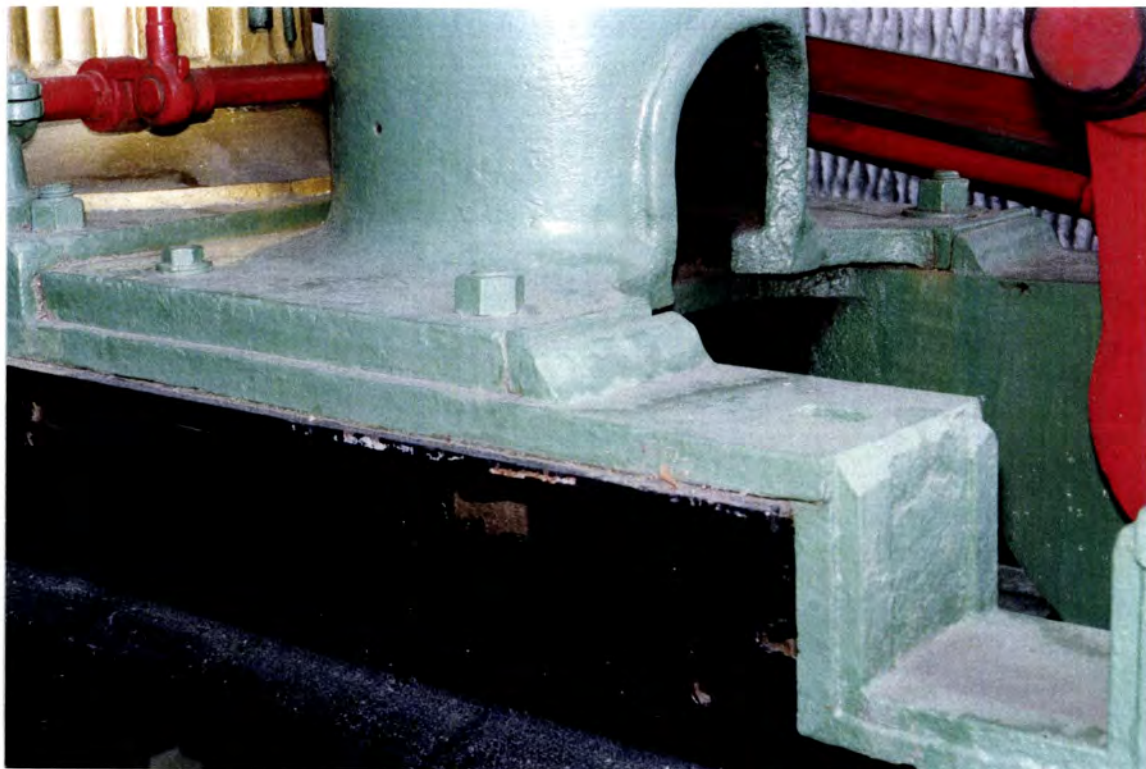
Showing Integrally cast locating lugs in C.I. Base Plate for location of H.P. cylinder and cut away portion of the cylinder pedestal.
